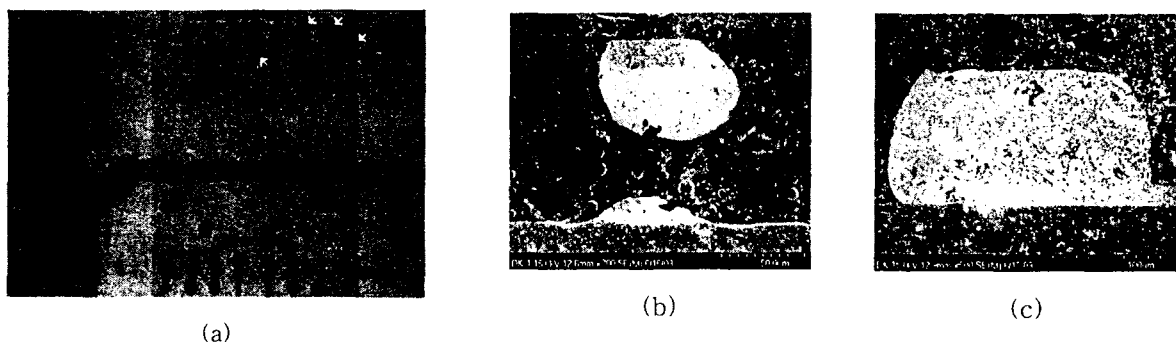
(a) The X-ray radiography of sample after solder bumps bonding on substrate (b) no welding joint (c) good welding joint
